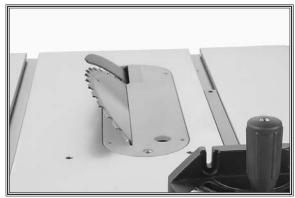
Blade tilted to 45° for bevel cutting on a typical table saw.
